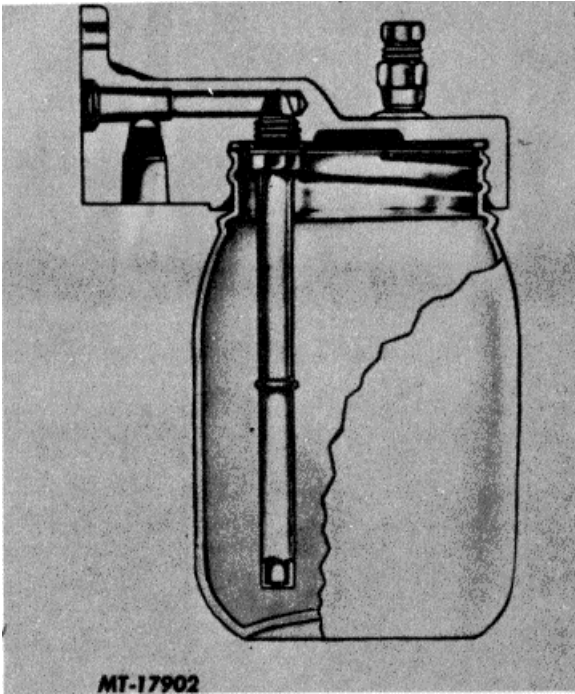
Cutaway View of AE-1 Alcohol Evaporator
